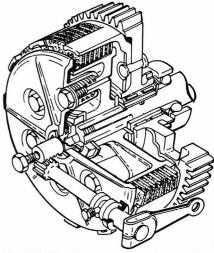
Cross sectional view of clutch and clutch release mechanism.
